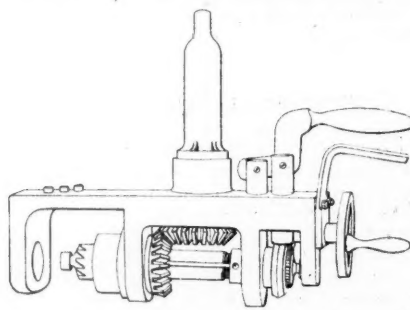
Countersink for Inside of Tubesheet Flanges.
